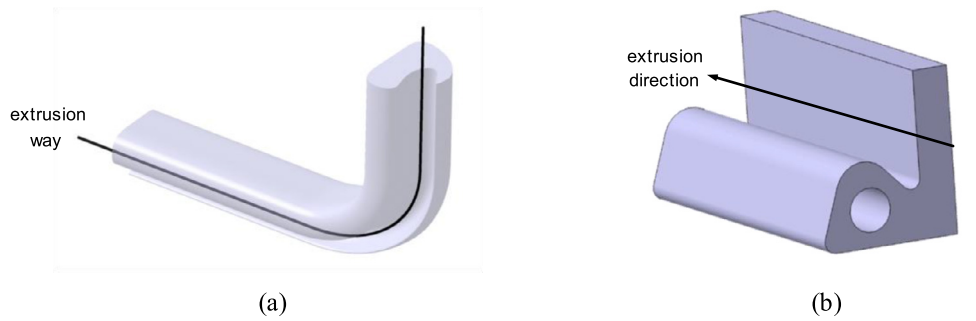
Examples of extruded components: (a) solid cross-section; (b) hollow cross-section.
